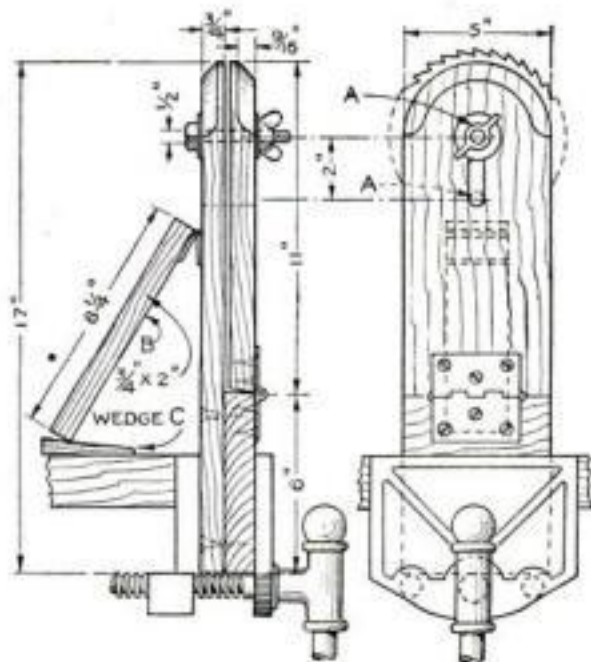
Front and end views of a circular saw filing clamp to be used in a bench vise.
